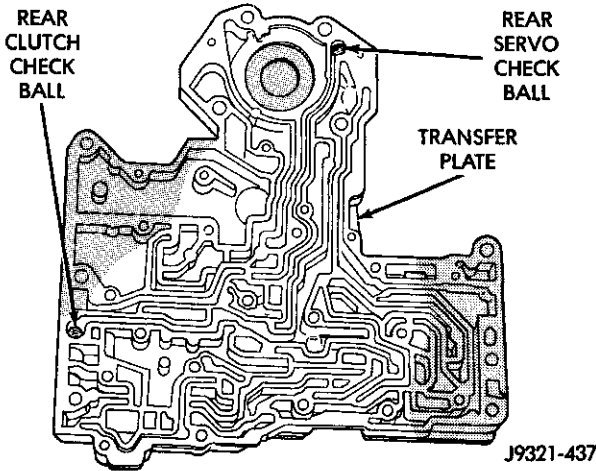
Rear Clutch And Rear Servo Check Ball Locations
